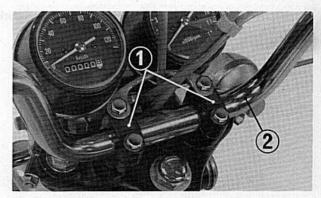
(1) Upper holder (2) Steering handlebar
